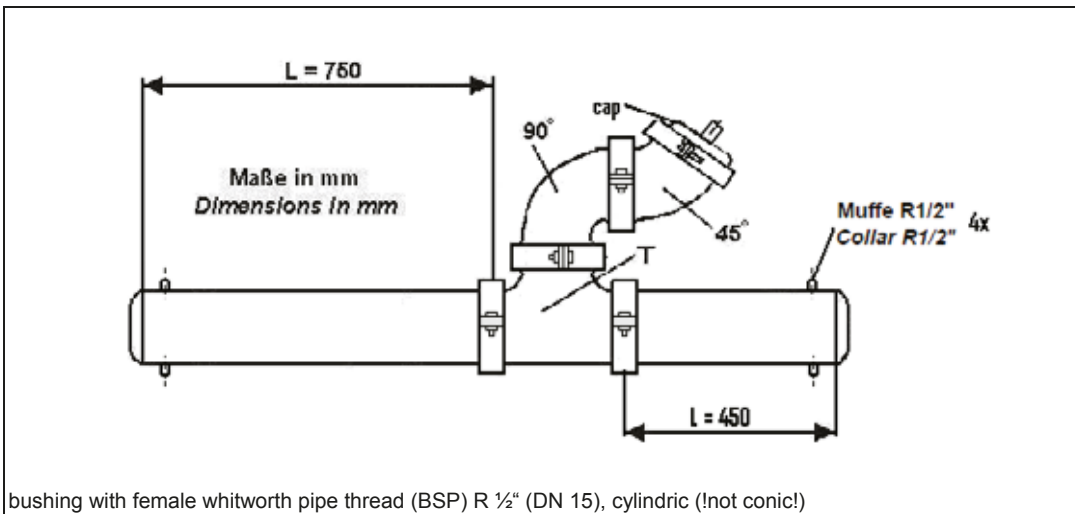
Test sample assembly for pipe fittings – series (T-piece)
